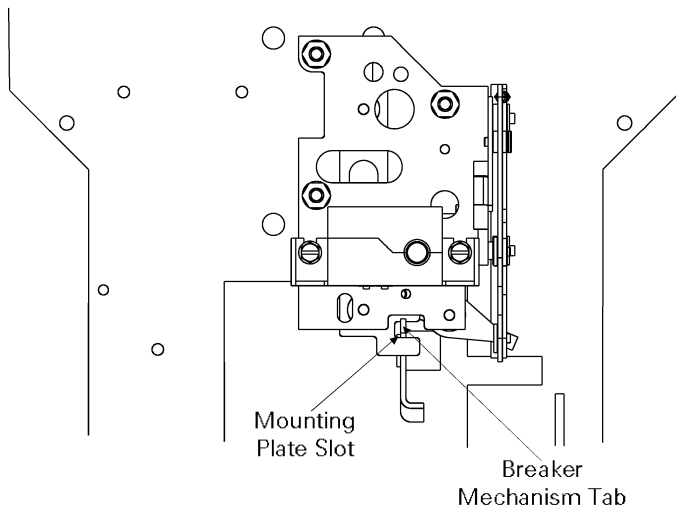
Front view of the Bell Alarm with Lockout installation, showing the breaker mechanism tab engaging the mounting plate slot.
